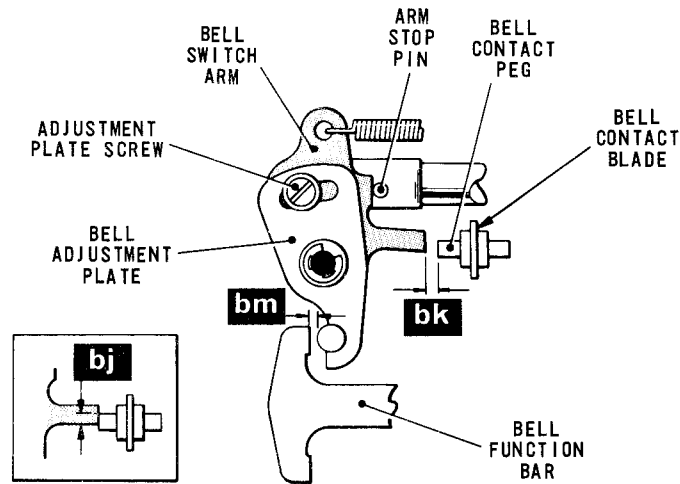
BELL CONTACT OPERATING MECHANISM
